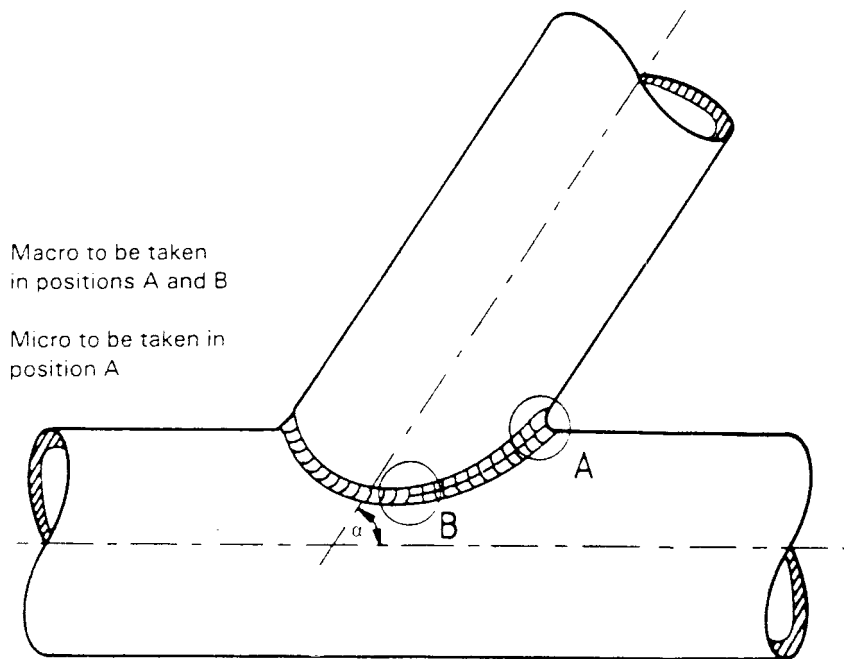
Location of test specimens for a branch connection or a fillet weld on pipe
